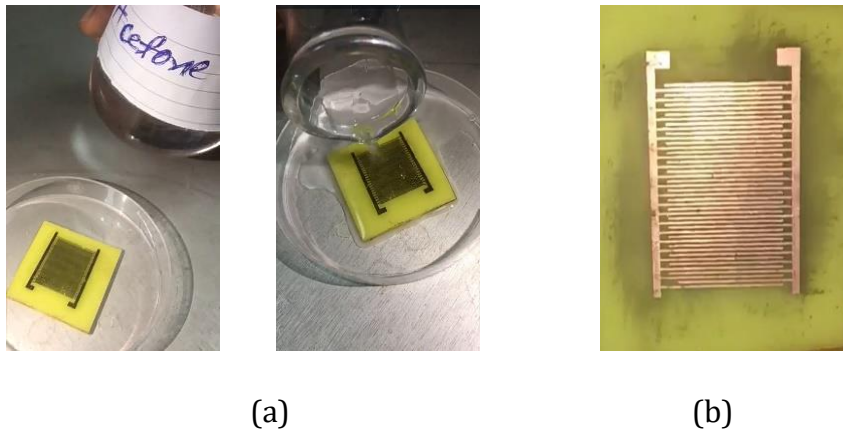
(a) Ink pattern removed using acetone (b) IDE design after removing ink.
